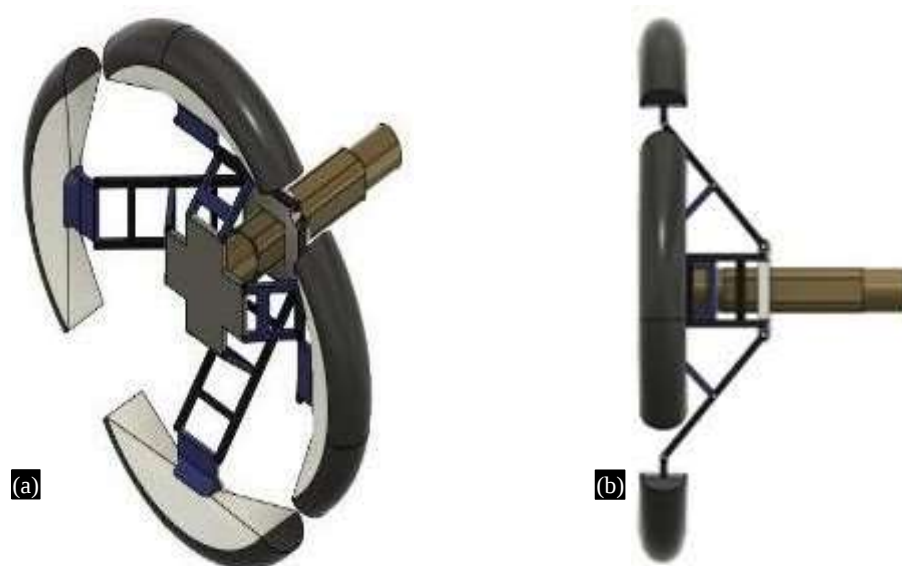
3D model of the umbrella wheel mechanism (a) Front view, (b) Side view.
